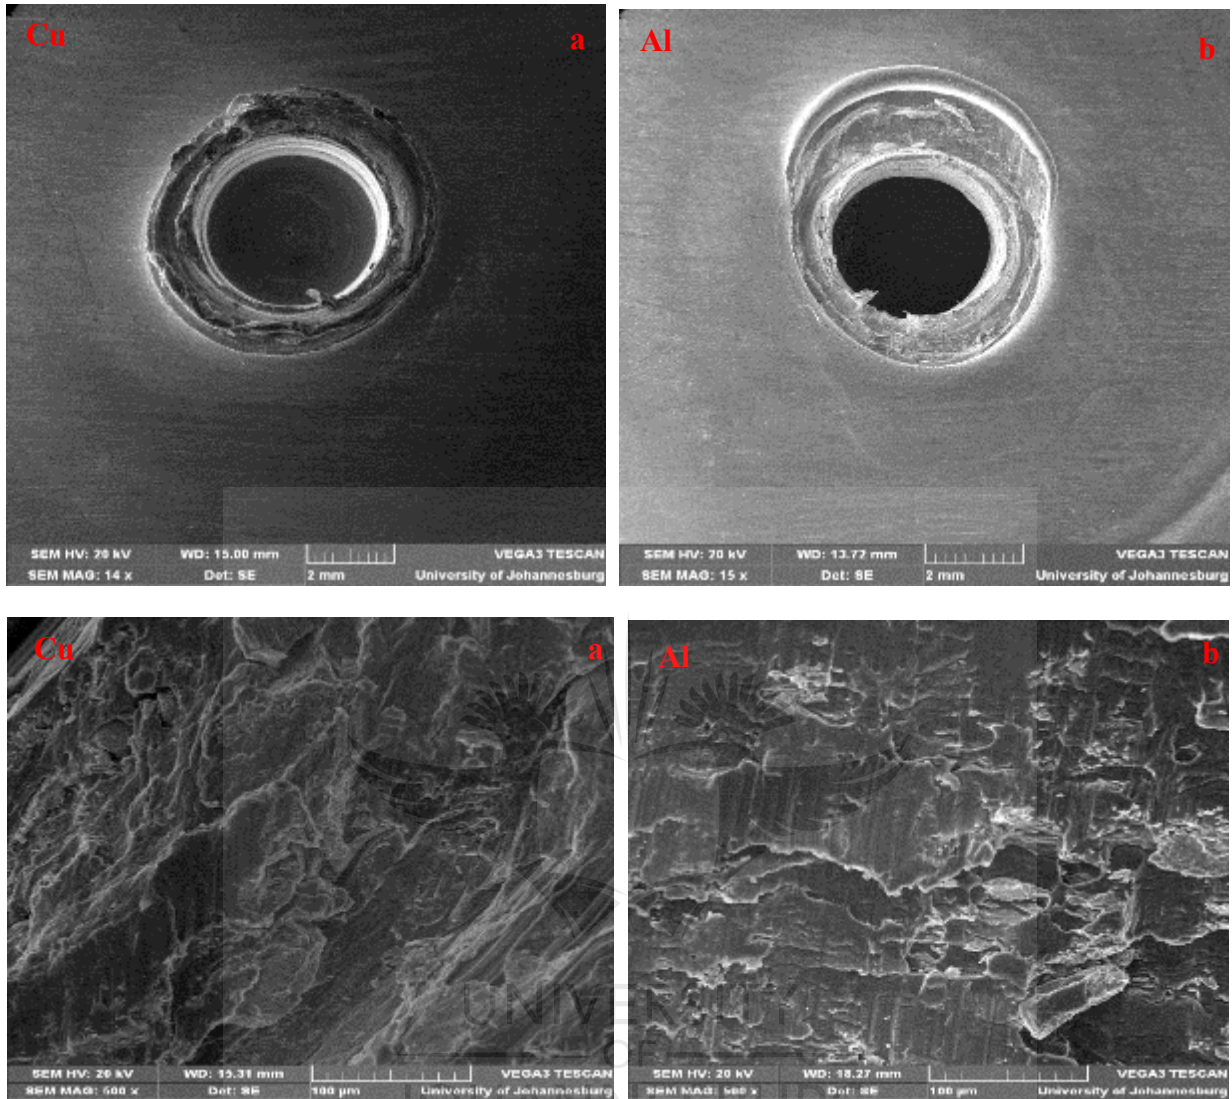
SEM images of spot weld produced using a flat pin and a flat shoulder tool; the rotation speed was 1200 rpm and the shoulder plunge depth of 0.5mm, (a) failed nugget upper sheet (Cu), (b) the lower sheet (Al), (c) and (d) fractured surface on the copper and aluminium side, respectively
